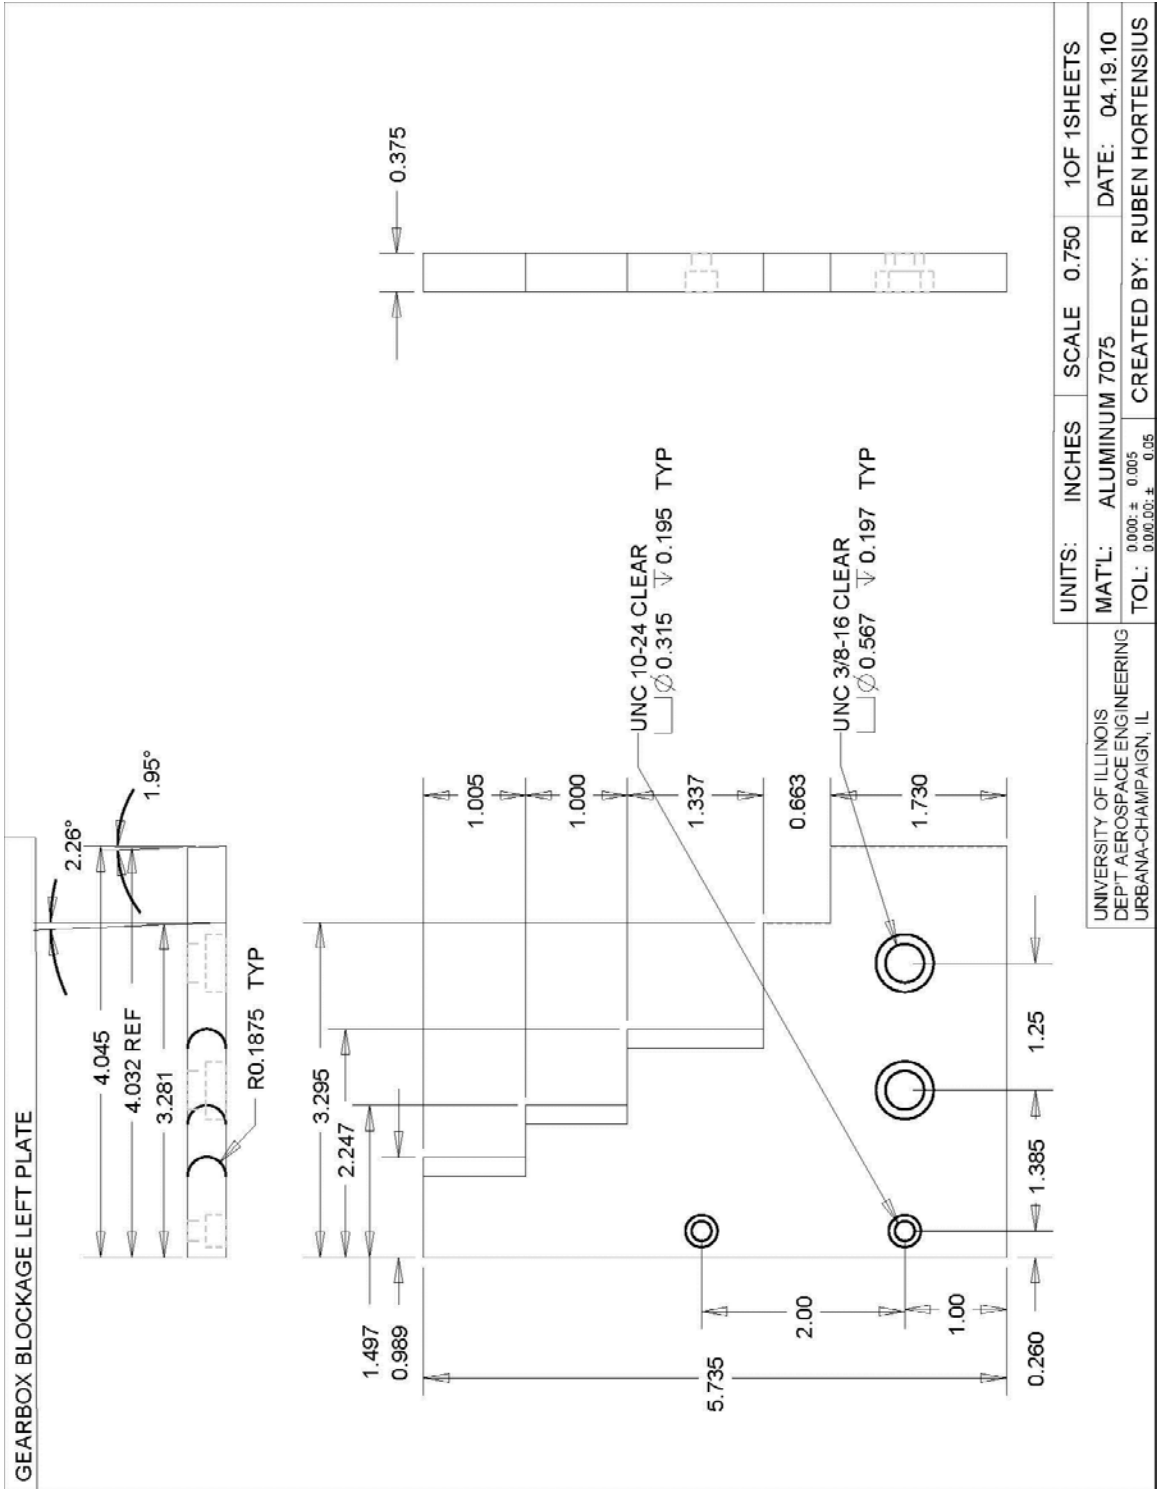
Gearbox Blockage Left Plate Engineering Drawing.
